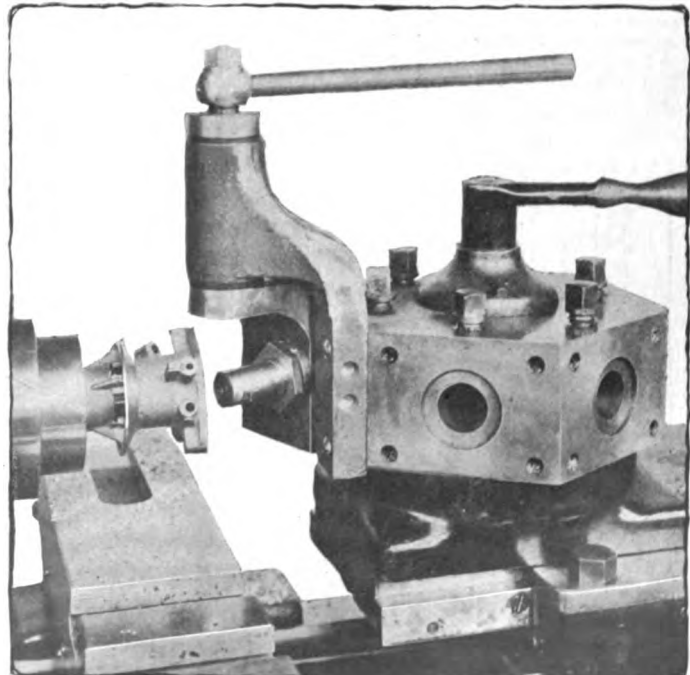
Tool for cutting radius in body for the travel of butterfly valve
